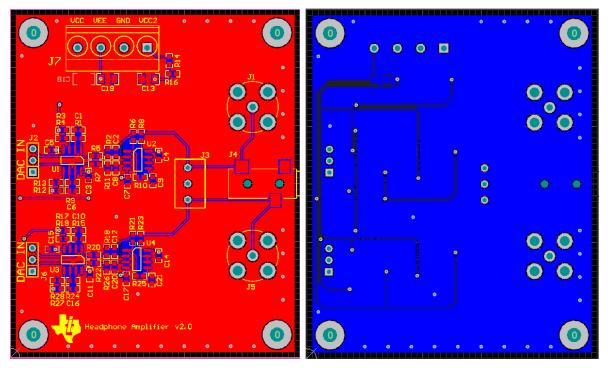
Top layer (left) and bottom layer (right) of the PCB.
